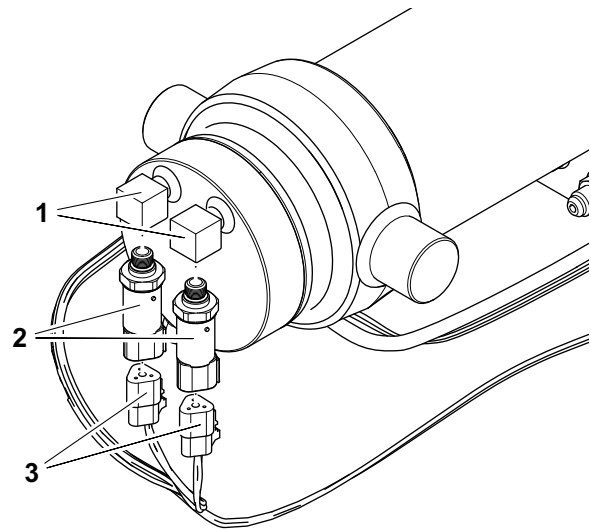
LSS Pressure Sensors Location - 3248RS/10RS - (If Equipped)
